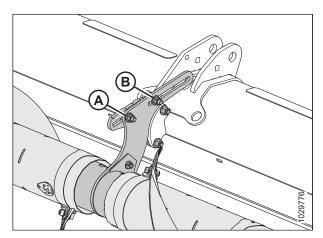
Initial Position of Adjustable Mounts – Two-Piece Auger
